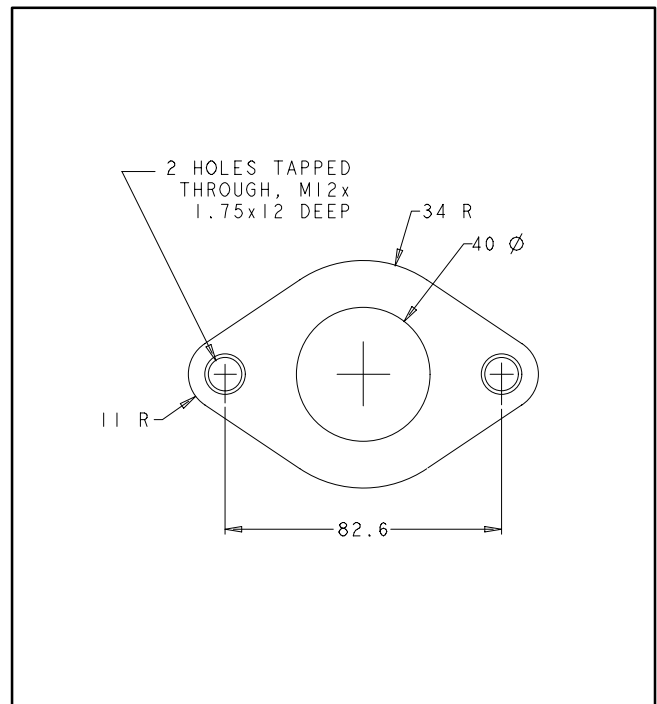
EXHAUST FLANGE—NON-TURBOCHARGED ENGINES
